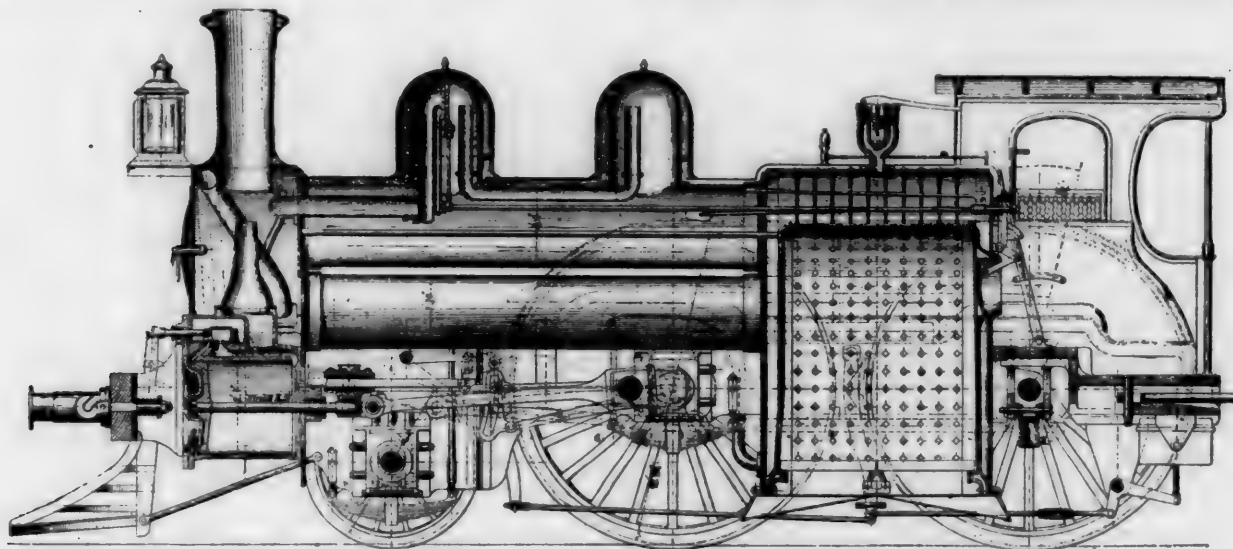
SECTIONAL ELEVATION OF ENGINE.
